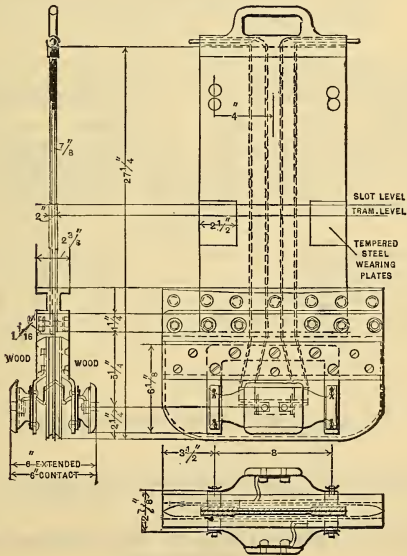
Section, Side and End Elevation of Plow, Metropolitan Street Railway, New York. — Standard Work, 1897-99.
